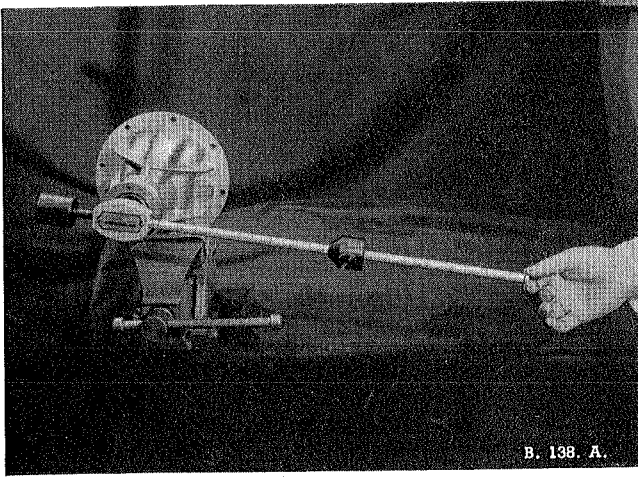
Checking the bevel pinion bearing pre-load (Service Tool No. 18G 207).
